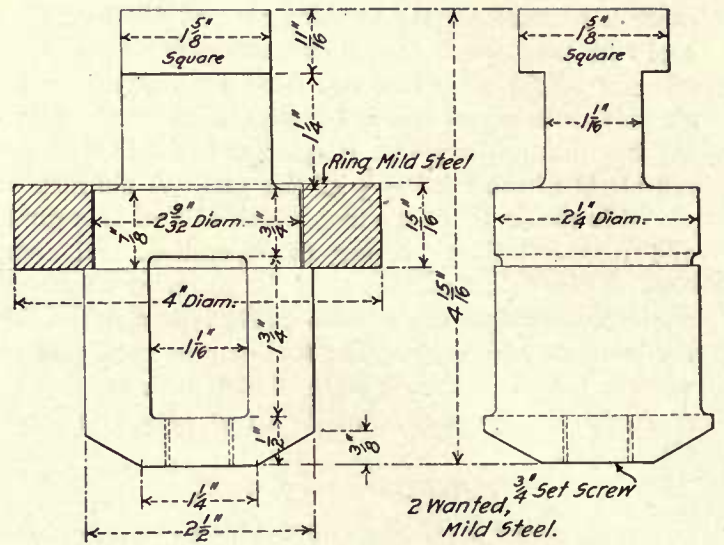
Special Tool Post Used on Slotter for Machining the Ends of Engine Truck Pedestals.
